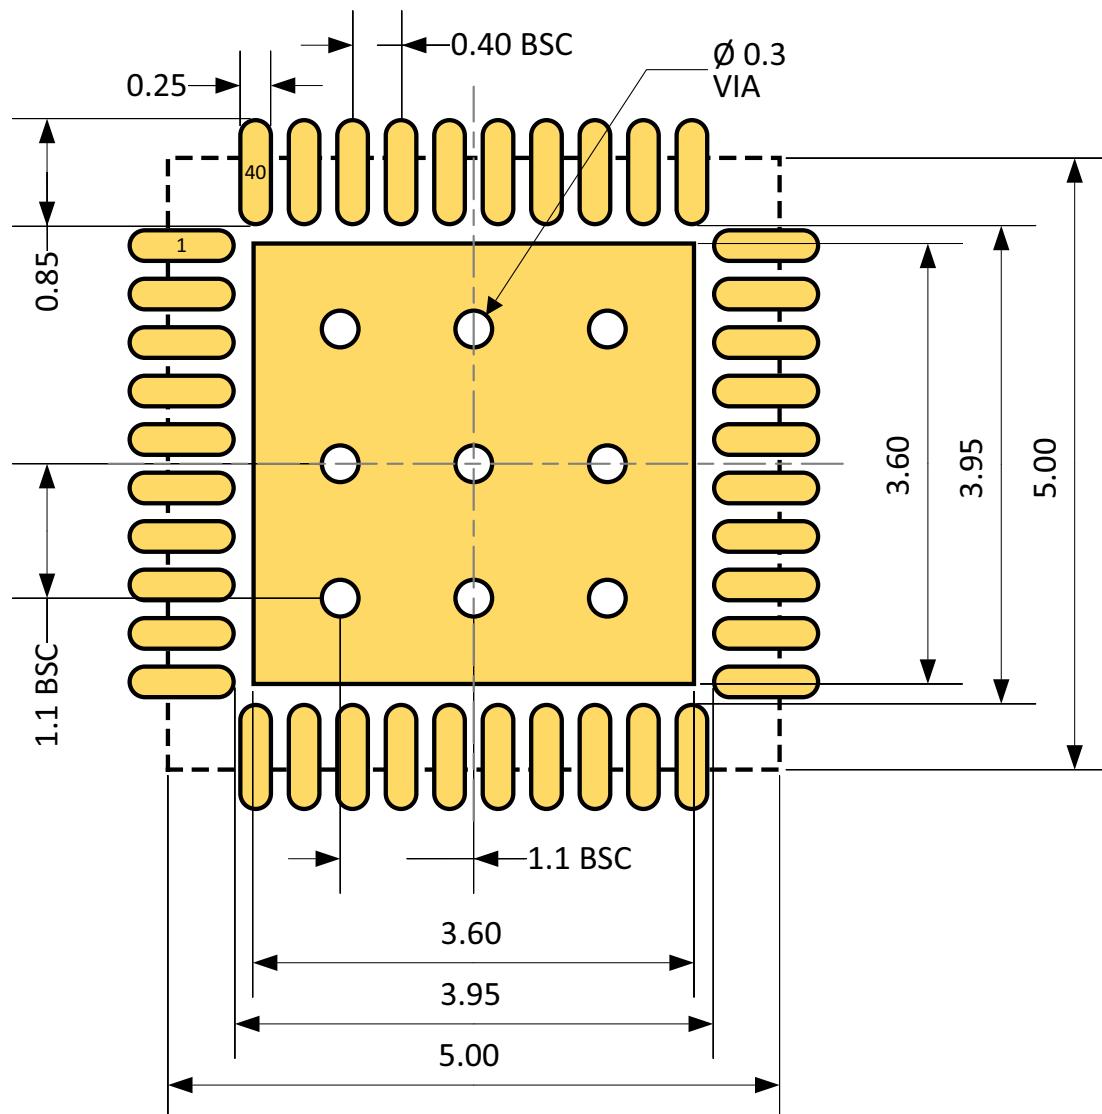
Recommended board layout for QFN40 package (all dimensions in mm)
